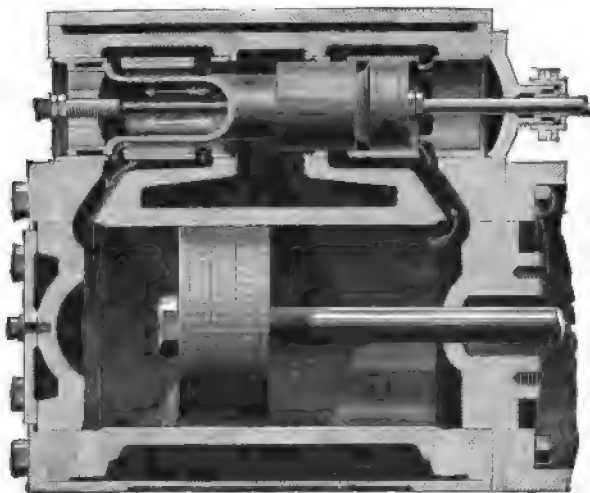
DOUBLE-PORT PISTON-VALVE.
